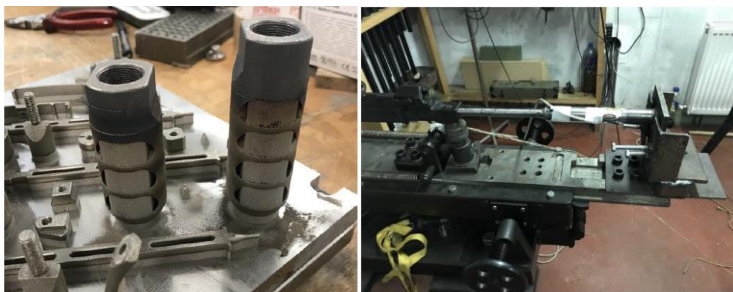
Muzzle brake prototype – left and experimental measuring of recoil force – right
